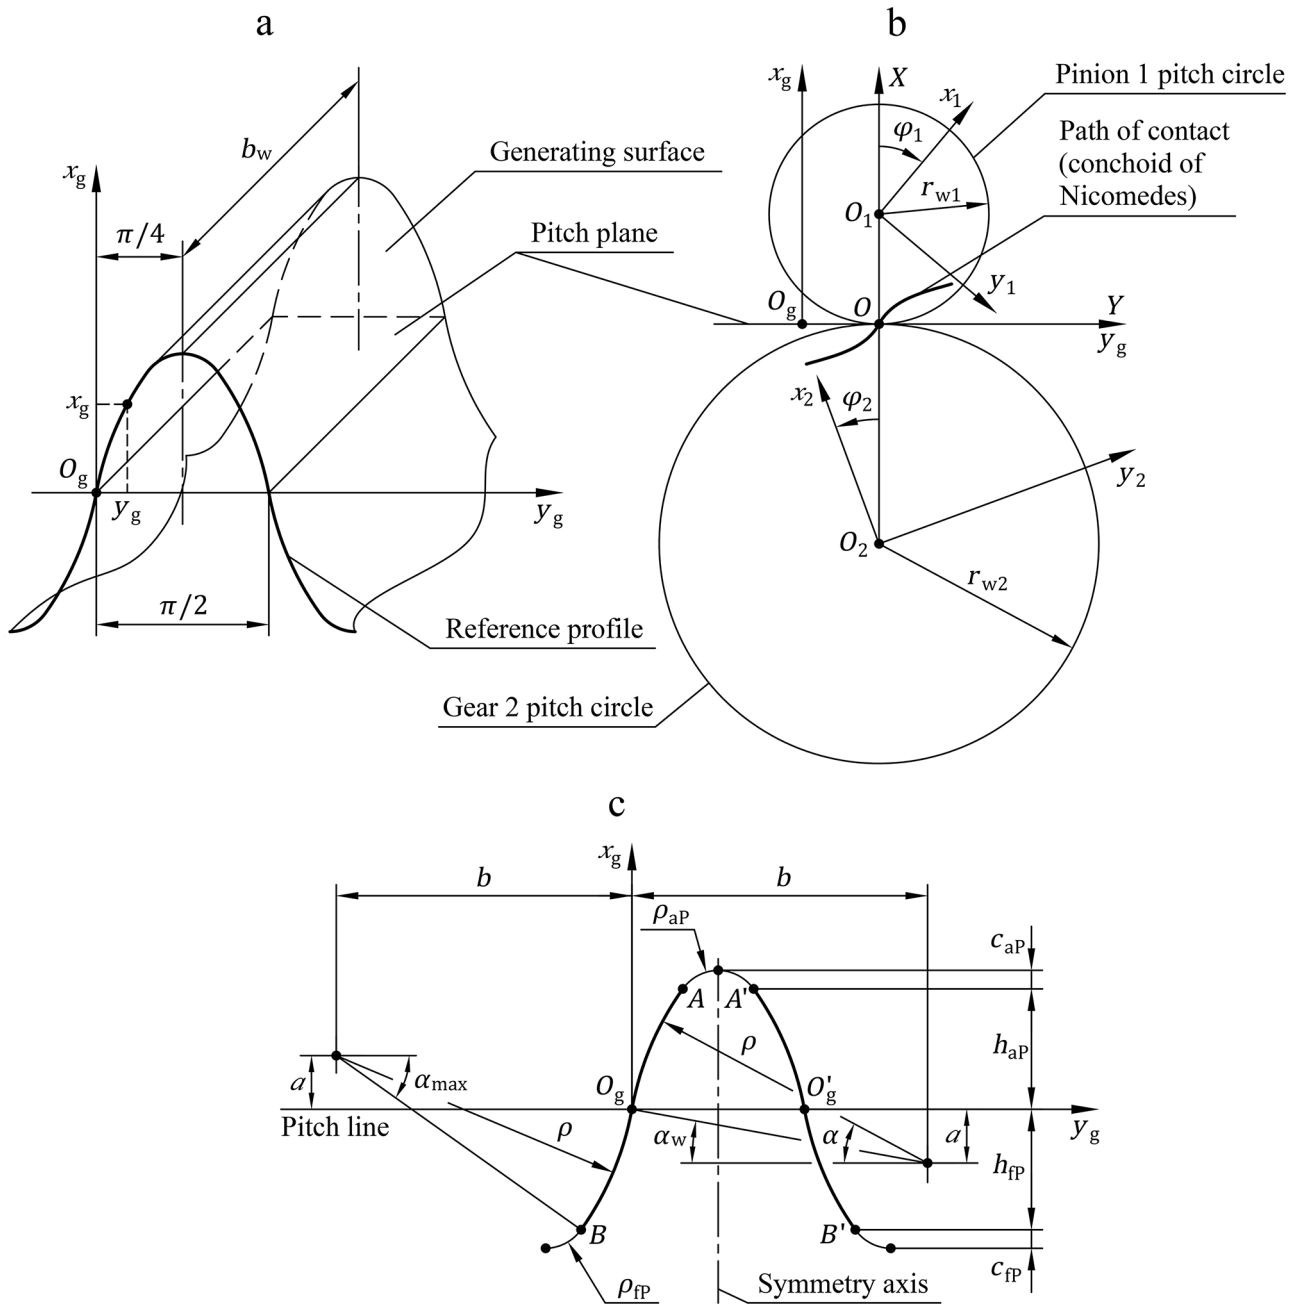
Geometry of conchoidal gears: (a) generating surface; (b) pinion 1 and gear 2; (c) reference profile.
